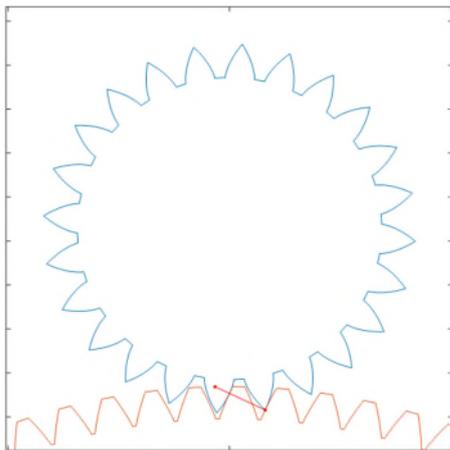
Gear Mesh with Long & Short Addendums with Uneven Tooth Widths
